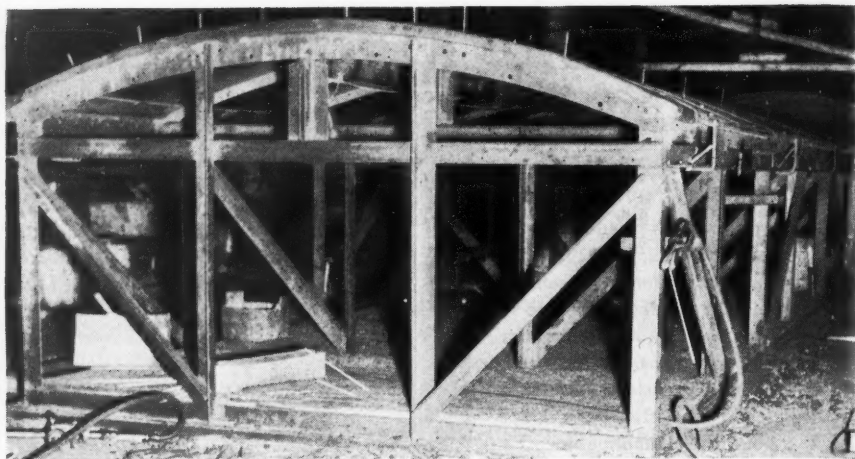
View Showing Roof Being Fitted and Tack Welded in Jig.
